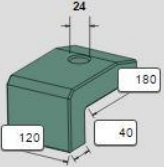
PLATEN LAYOUT FOR BUHLER1400_SCLPAD1
